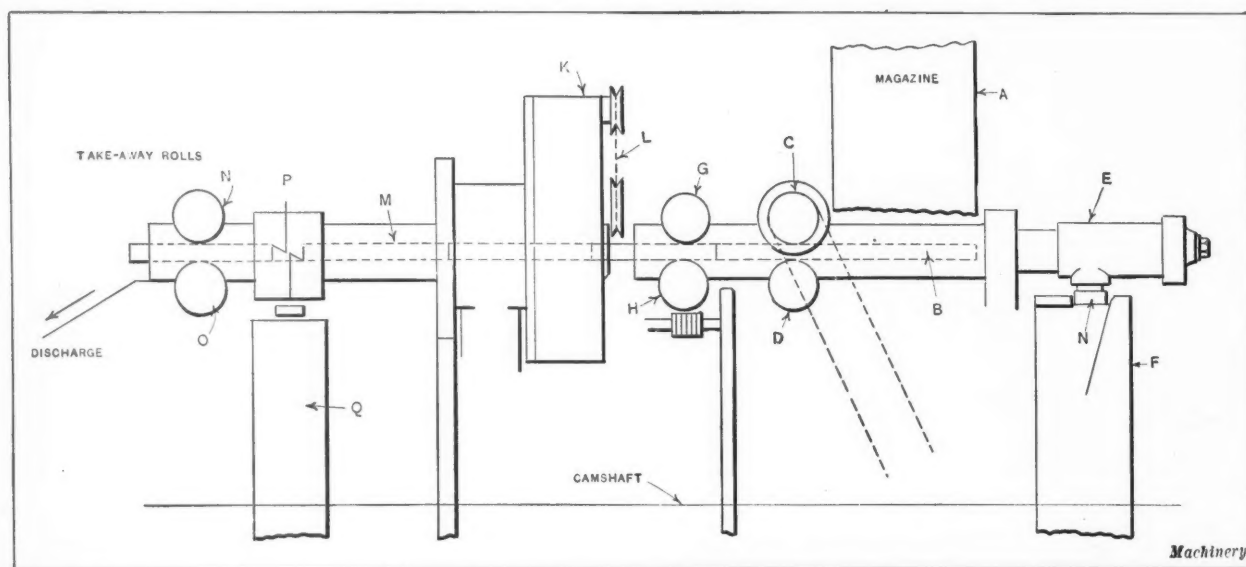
Diagrammatic Lay-out of Coil-winding Machine
